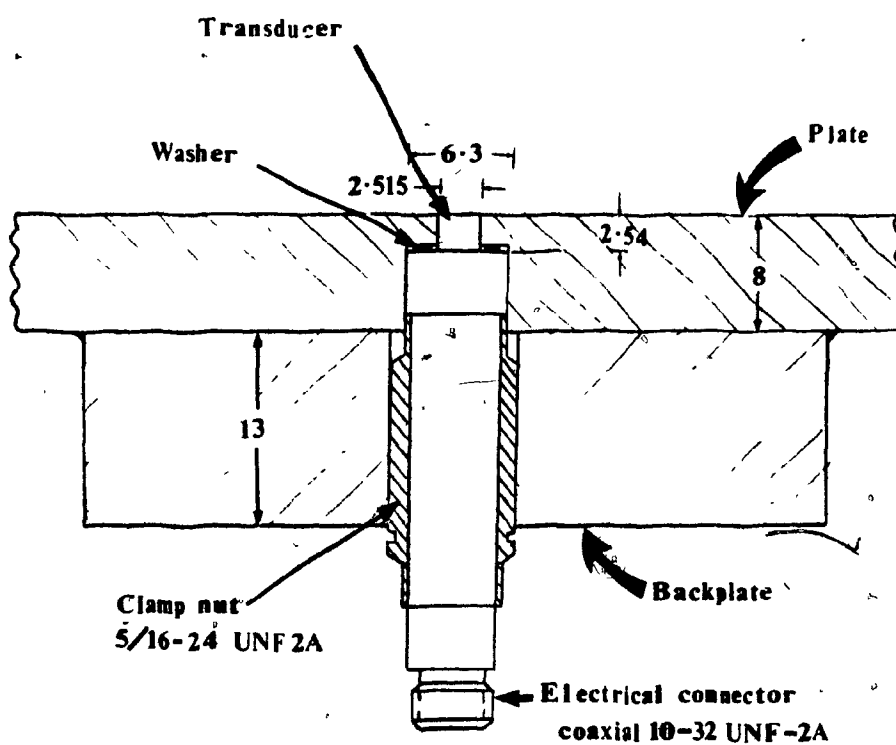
Mounting arrangement for the PCB pressure transducer. (All dimensions are in mm.)
